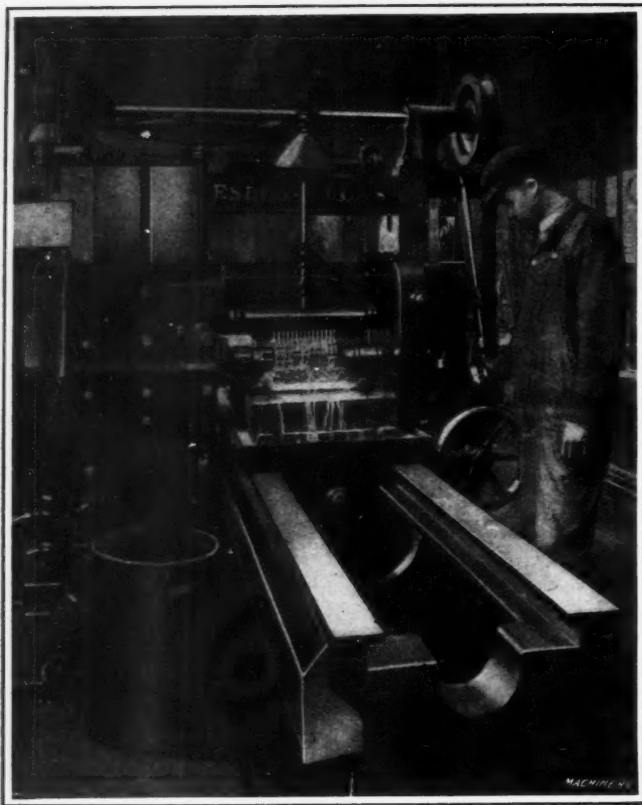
Means of distributing Lubricant on Espen-Lucas Planer Type Milling Machine
